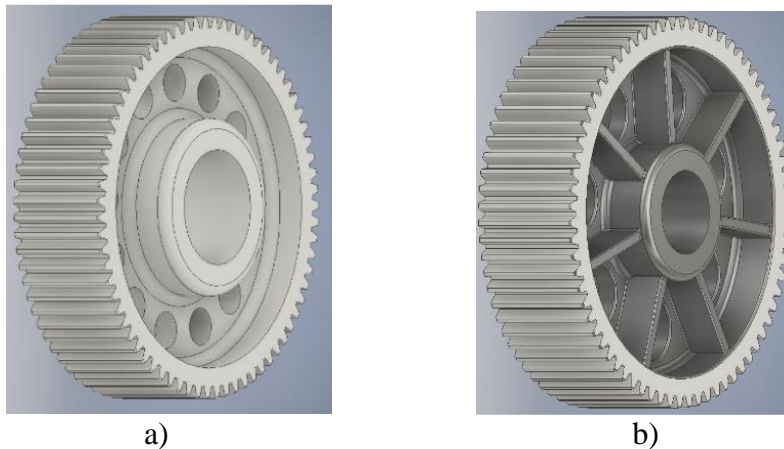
Design of body gear wheel of a) forged and b) cast blanks of the spur gears
